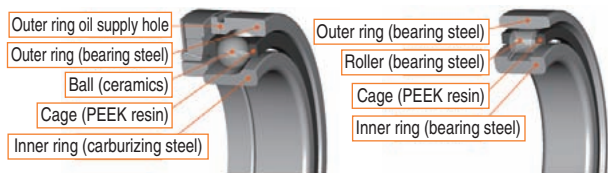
Ultra-high-speed angular contact ball bearing and cylindrical roller bearing
